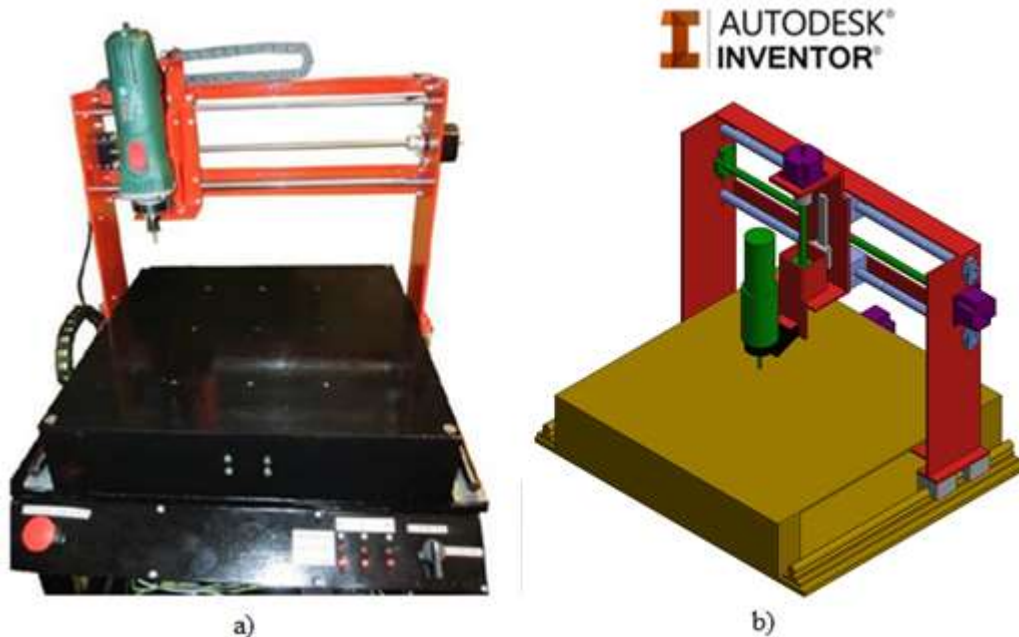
3 axis milling machine a) real product b) model in Autodesk Inventor
